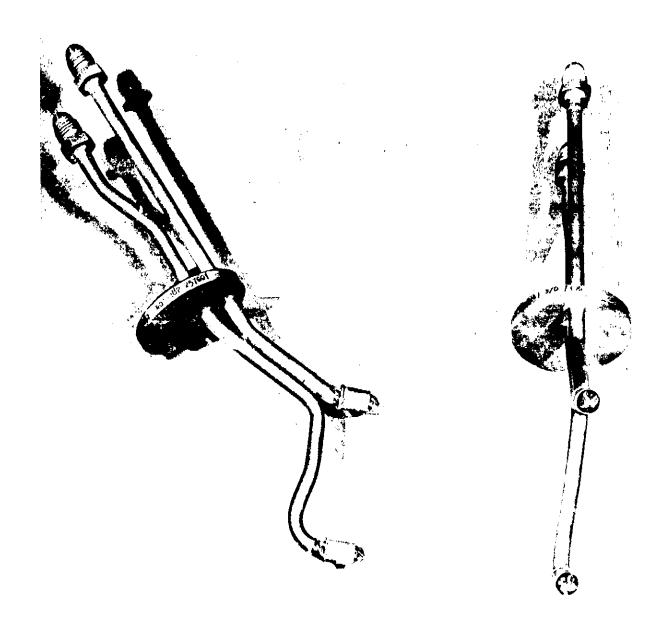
Fuel Injector Assemblies, Double Annular Combustor.
